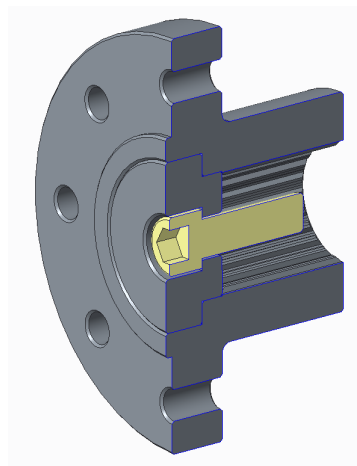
Initial design of the flange adapter between the motor shaft and the torque flange
